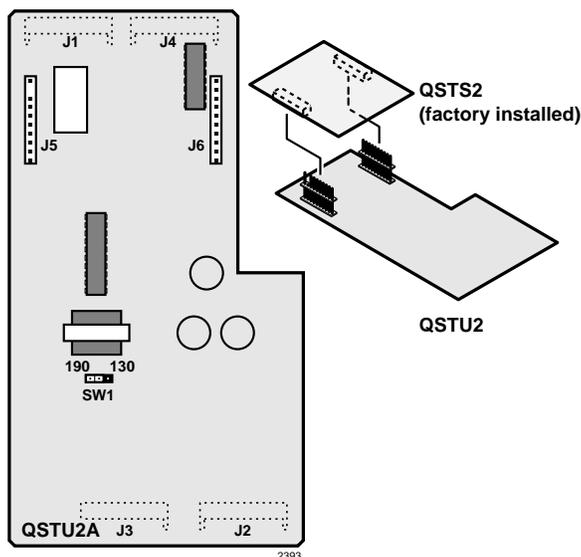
QSTU2/QSTS2 Printed Circuit Boards
